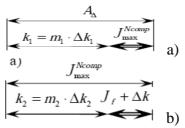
Dimensional chains of the compensators to ensure functional clearance
